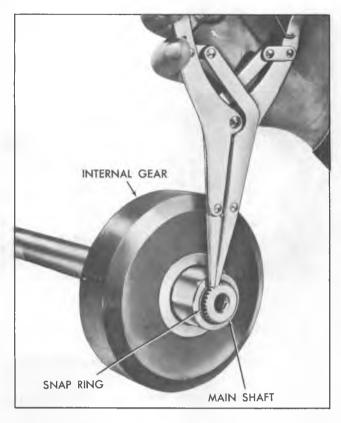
T-Removing Rear Internal Gear to Main Shaft Snap Ring
